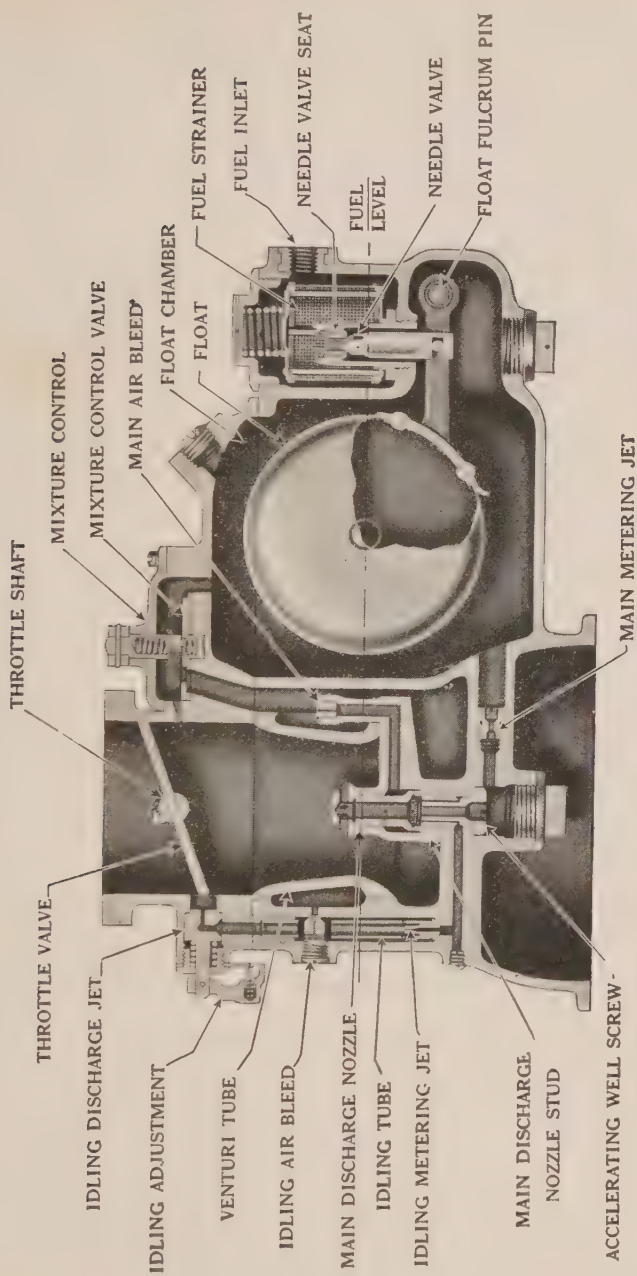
Cross-section of typical airplane carburetor. (Courtesy Stromberg Motor Devices Co.)
